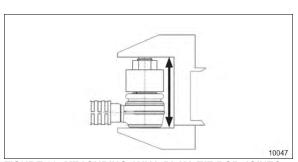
MEASURING AXIAL PLAY, TIE ROD JOINTS
